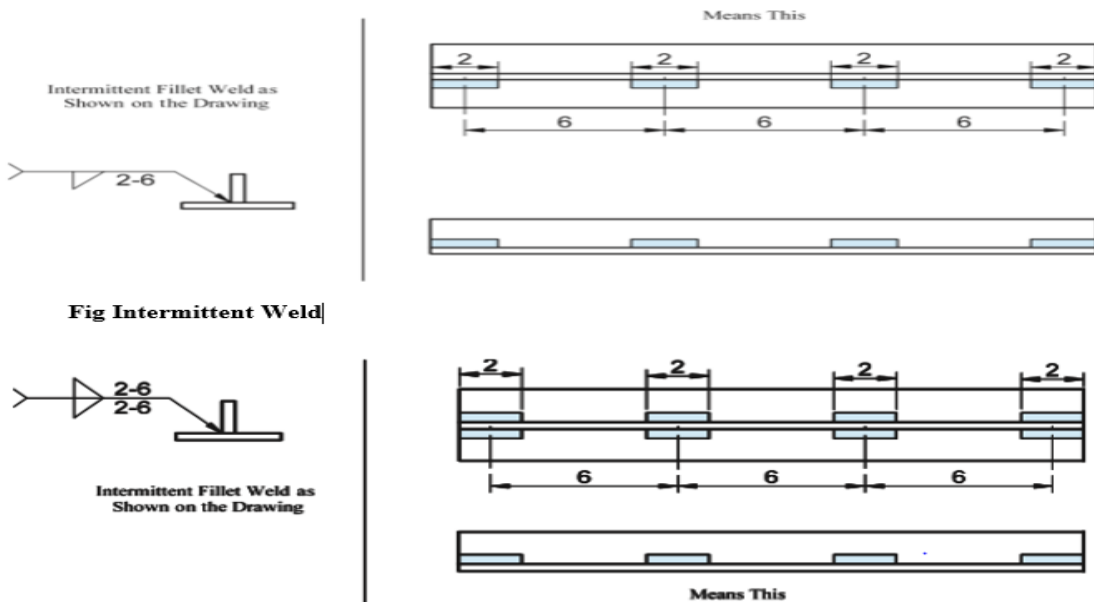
Shielded metal arc welding Symbols.
